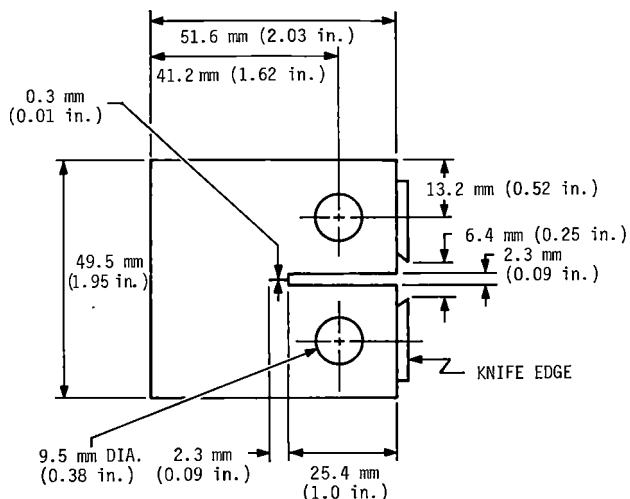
Dimensions of compact tension fracture toughness test specimens. The thickness of the specimens was either 12.7 mm (0.5 in.) or 19.1 mm (0.75 in.).
